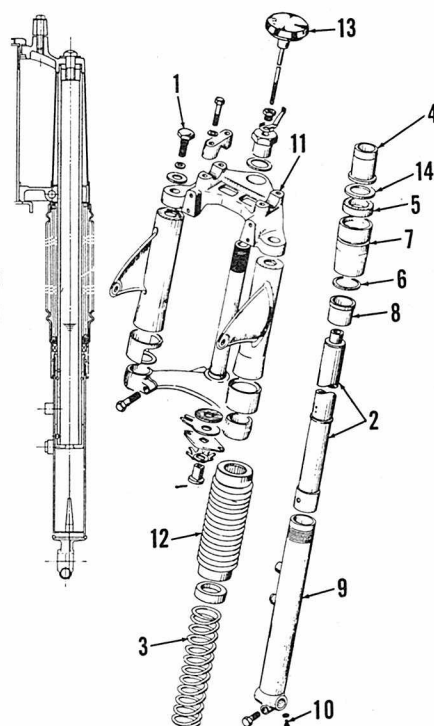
Exploded view of the front suspension. Cross section is at left.
